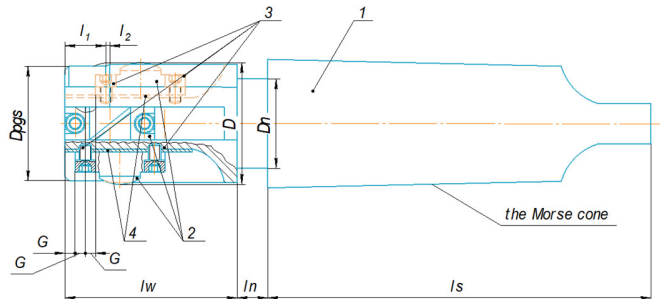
Design of a modular cutter-type reamer with rigidly fixed peackless cutting edges.
